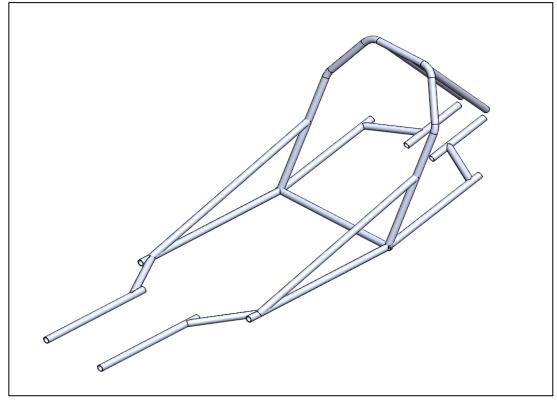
SolidWorks Sketch of Proposed Frame Design
